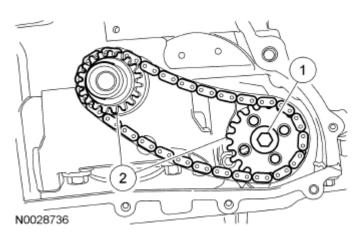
Removing Oil Pump Chain And Sprockets Courtesy of FORD MOTOR CO.
